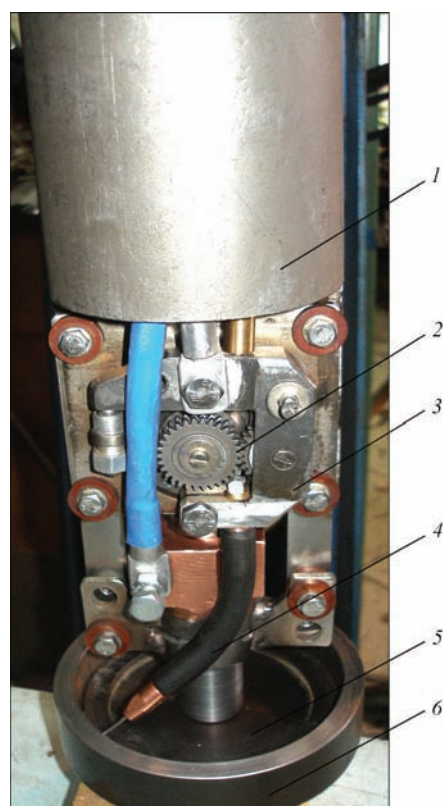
Welding assembly of the apparatus for deep-sea welding: 1 — body; 2 — feed mechanism; 3 — oscillation mechanism; 4 — welding torch; 5 — plug; 6 — pipe fragment
